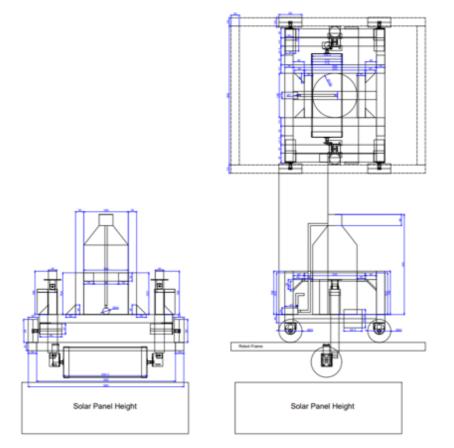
Moving Frame Orthographic Drawing - Side View Details
